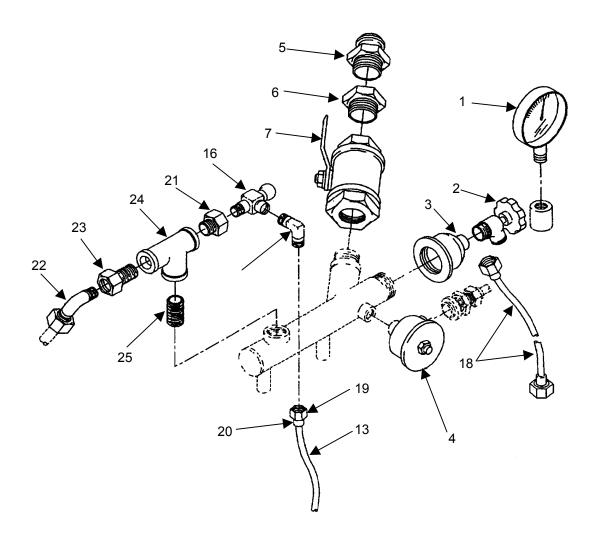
Upper (M85) Manifold Assembly (Sheet 2 of 3)
